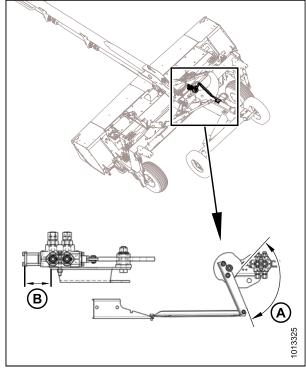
Transport Deploy/Swing Mechanism Assembly
